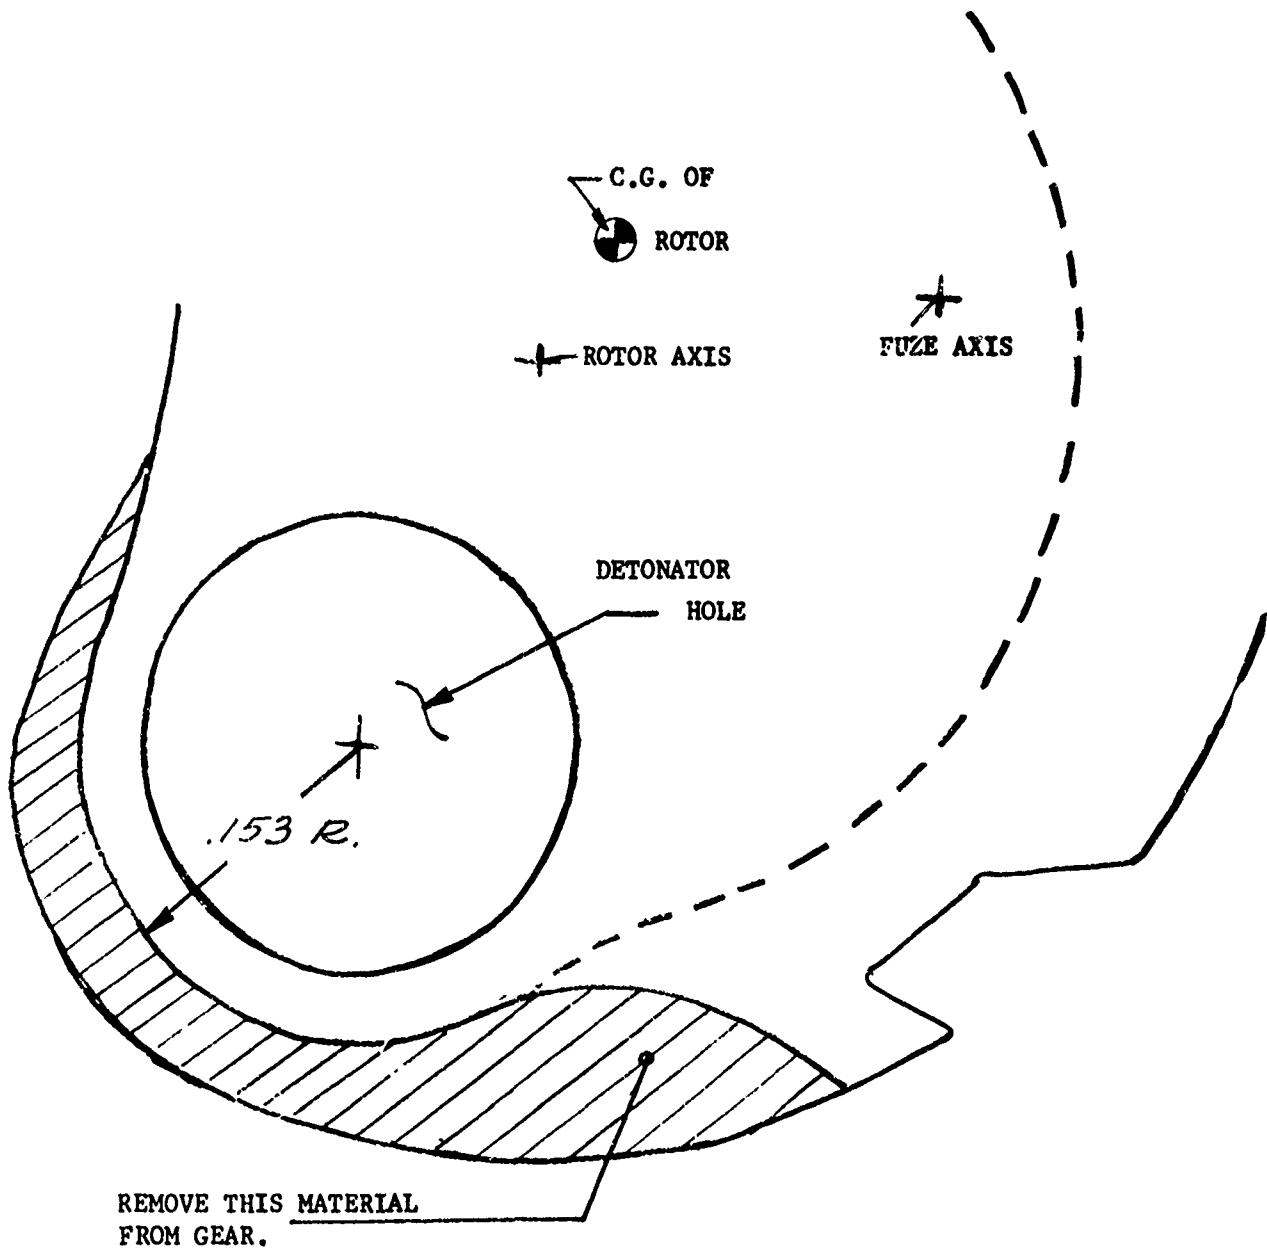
ROTOR GEAR MODIFICATION DETAIL
